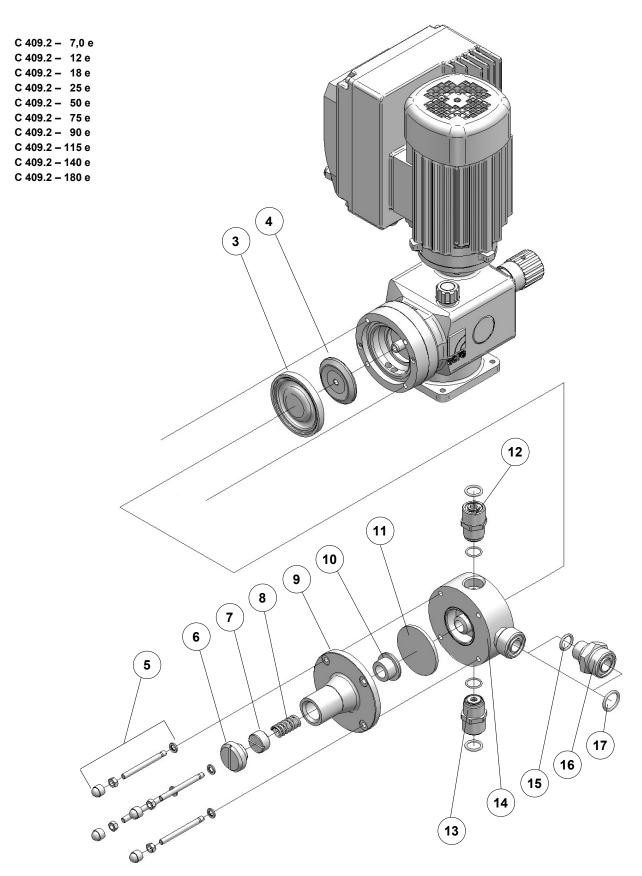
Spare- and wearing parts (C 409.2-7,0 e ...-180 e with integrated overflow valve)
